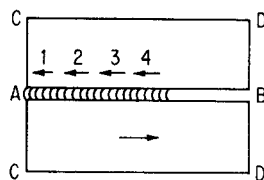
Schematic diagram of the backstep welding technique.
